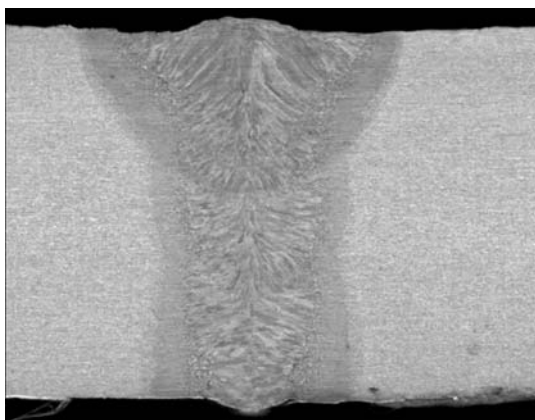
Macrosection of butt joint of steel 10G2FB ($\delta = 19$ mm) produced using hybrid welding for 4 passes at the condition: $P = 2.7$ kW; $v_w = 2.5$ m/h; $v_f = 400$ m/h (diameter of electrode wire of 1.2 mm); $I_w = 200$ A; $U_a = 25$ V; shielding gas – CO₂, consumption $Q = 20$ l/min
